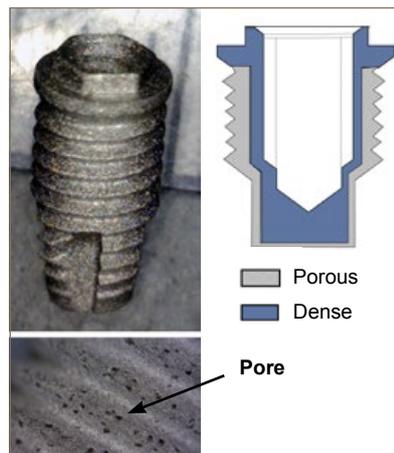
A MIM tooth implant manufactured with a functionally gradient structure (Courtesy Castem Co., Ltd.)
